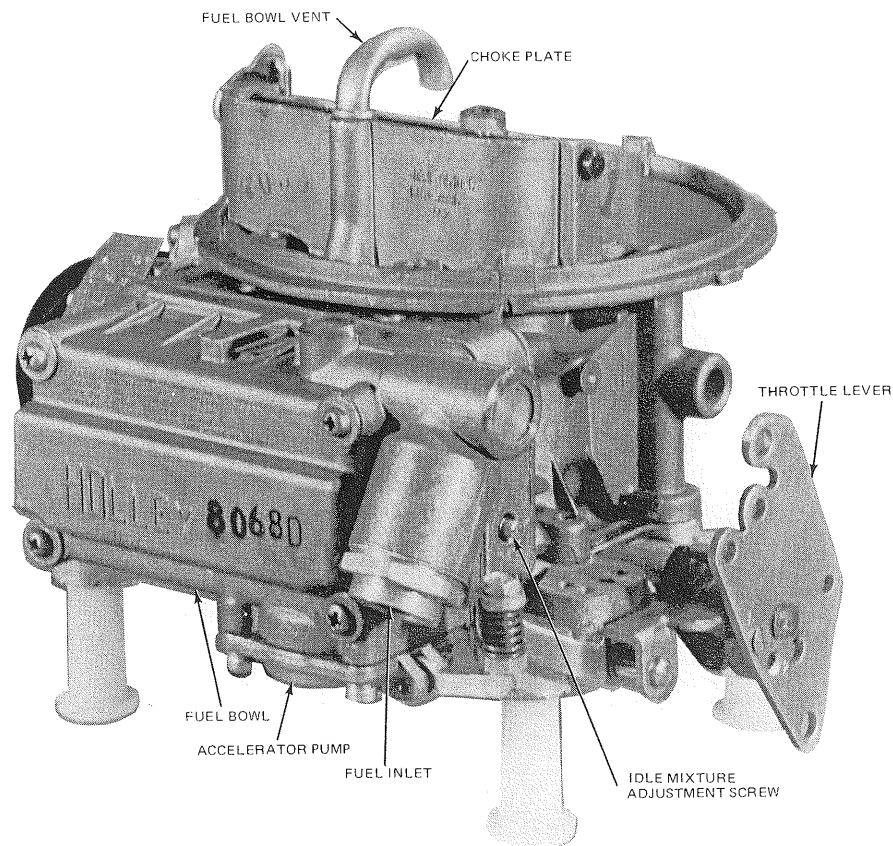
Model 2300 2-V Carburetor — Left Front View
